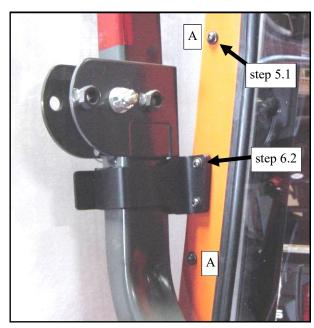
(view of left side of tractor) (lower roll bar mount shown here)
